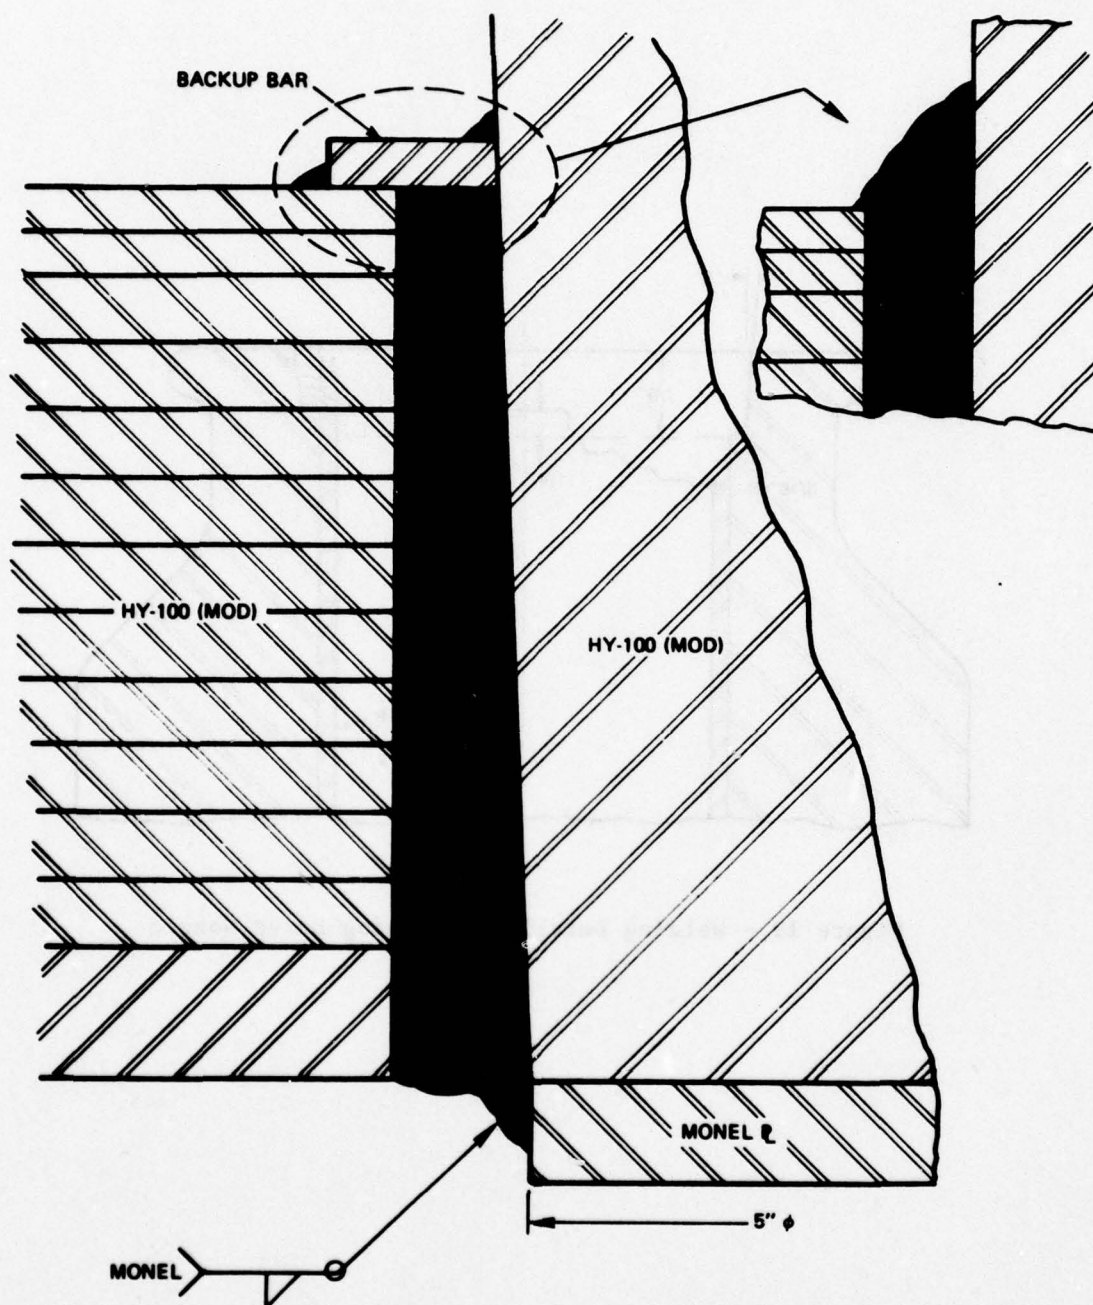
Welding Details for Securing Nozzles in Cylinders
